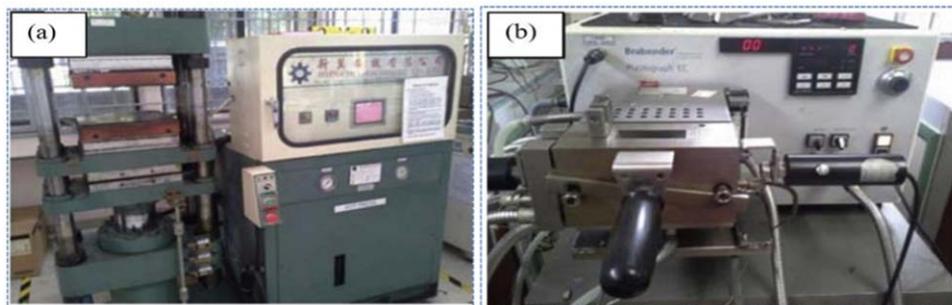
Bio-composites fabrication machine of (a) Hot-press machine and (b) Brabender machine.
